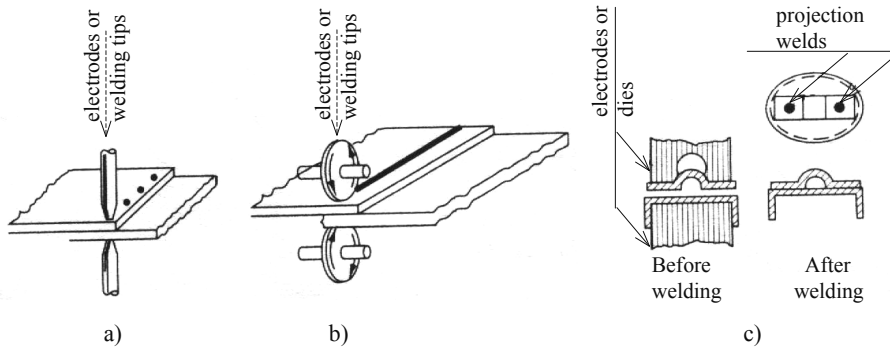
Resistance welding procedures: a) spot welding; b) seam welding; c) projection welding
